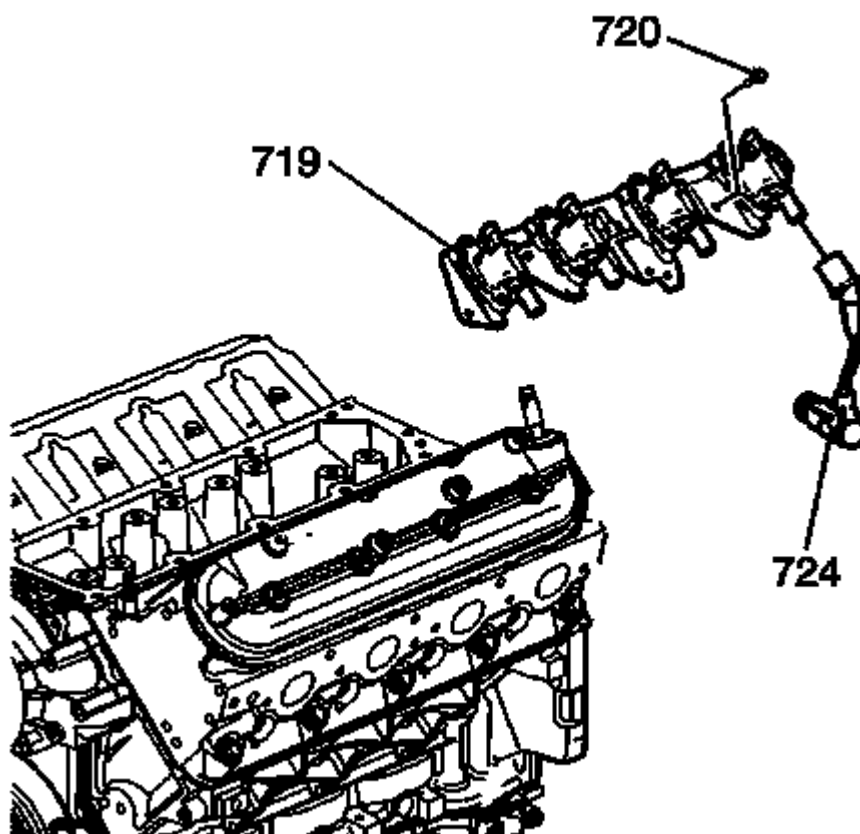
Left Spark Plug Wires, Ignition Coil Bracket & Bolts
